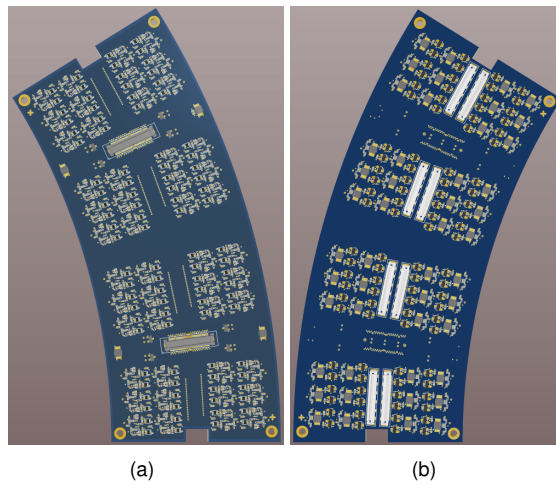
CAD model of top (a) and bottom (b) side of the preamplifier board. The size is 123 x 196 millimeter.
